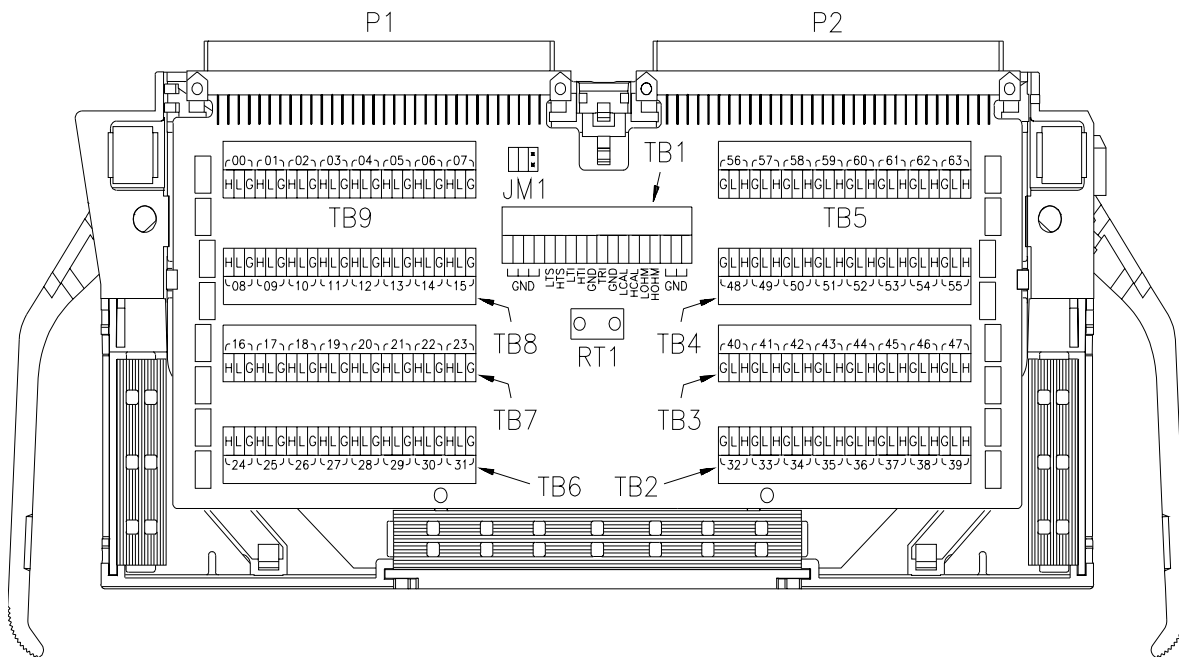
HP E1415A/E1419A Terminal Block PC Assembly Parts
